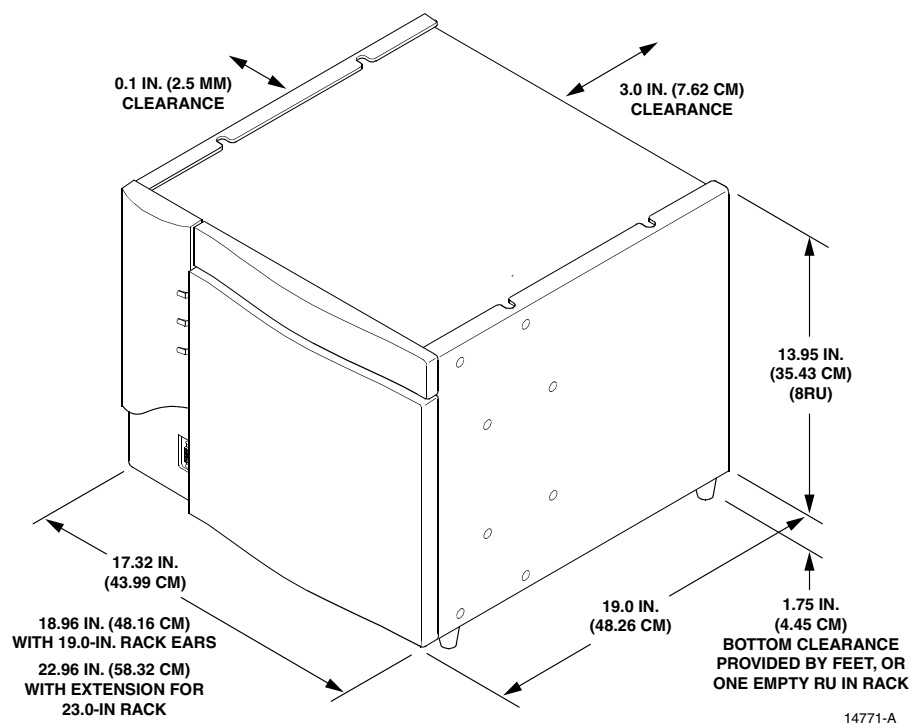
AAC-3 chassis dimensions and ventilation clearance requirements
